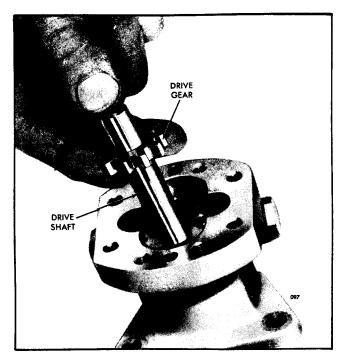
Installing Fuel Pump Drive Shaft and Gear Assembly
